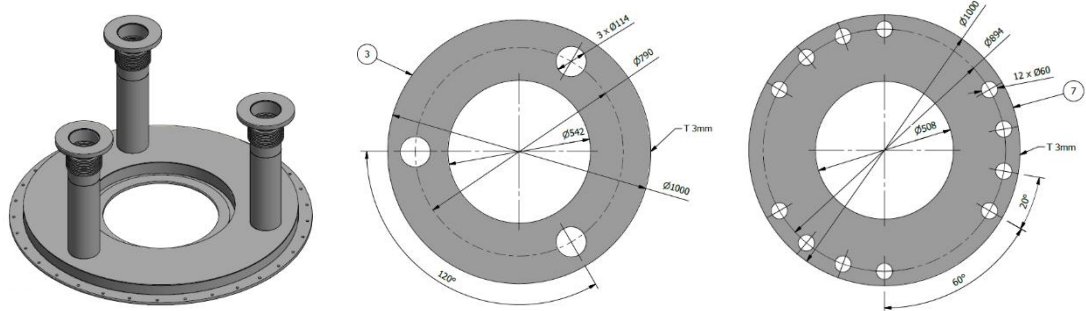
CAD images of the manifold. Isometric view and bottom view of the entrance and exit holes.
